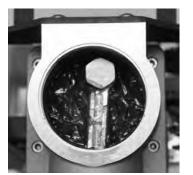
After completely cleaning out old grease, add new grease till level with the bottom edge of the crank pin head.
